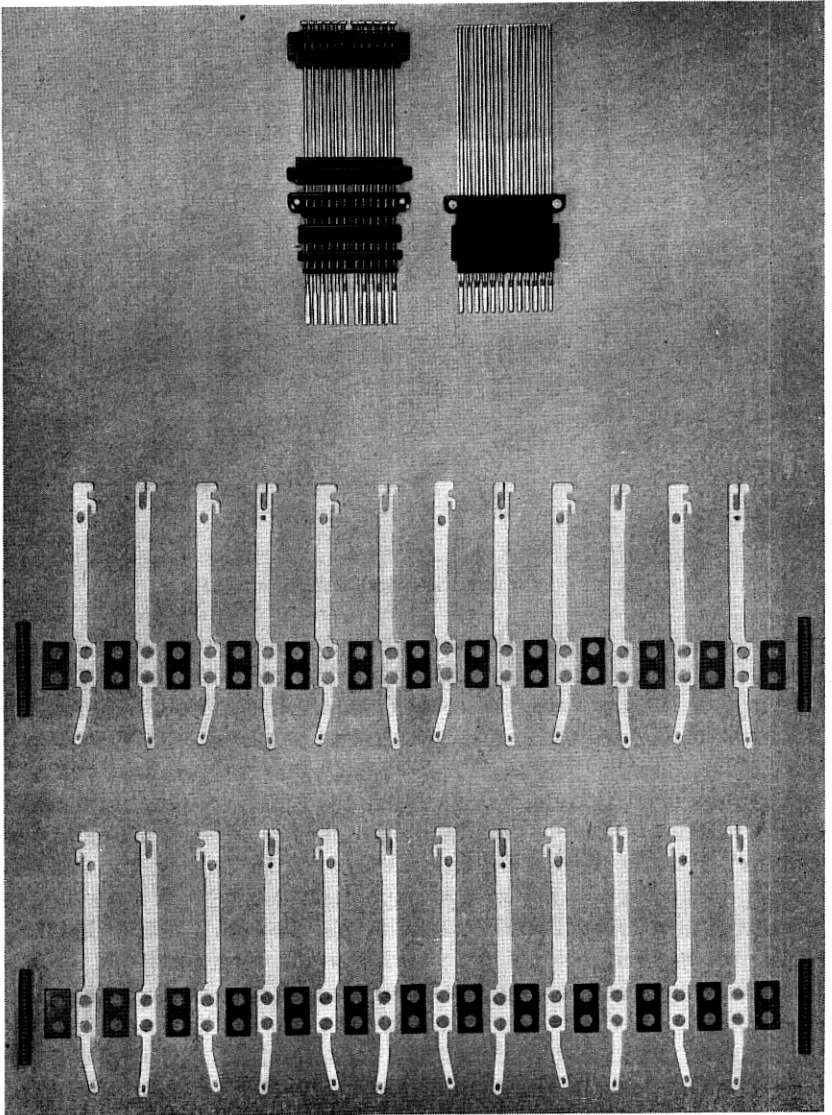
A comparison of the molded wire assemblies for twelve make contacts with the corresponding U relay parts.
